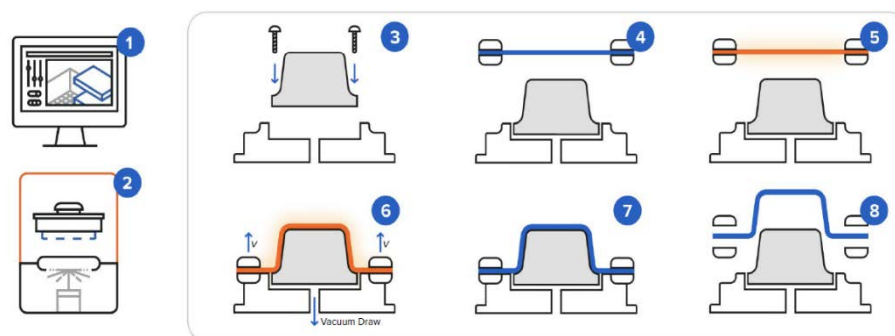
Thermoforming with 3D-printed molds (1—Mold design, 2—Mold 3D printing, 3—Mold assembly, 4—Sheet clamping, 5—Heating, 6—Forming, 7—Cooling, 8—Demolding and trimming) (image reproduced with Formlabs permission [117]).
